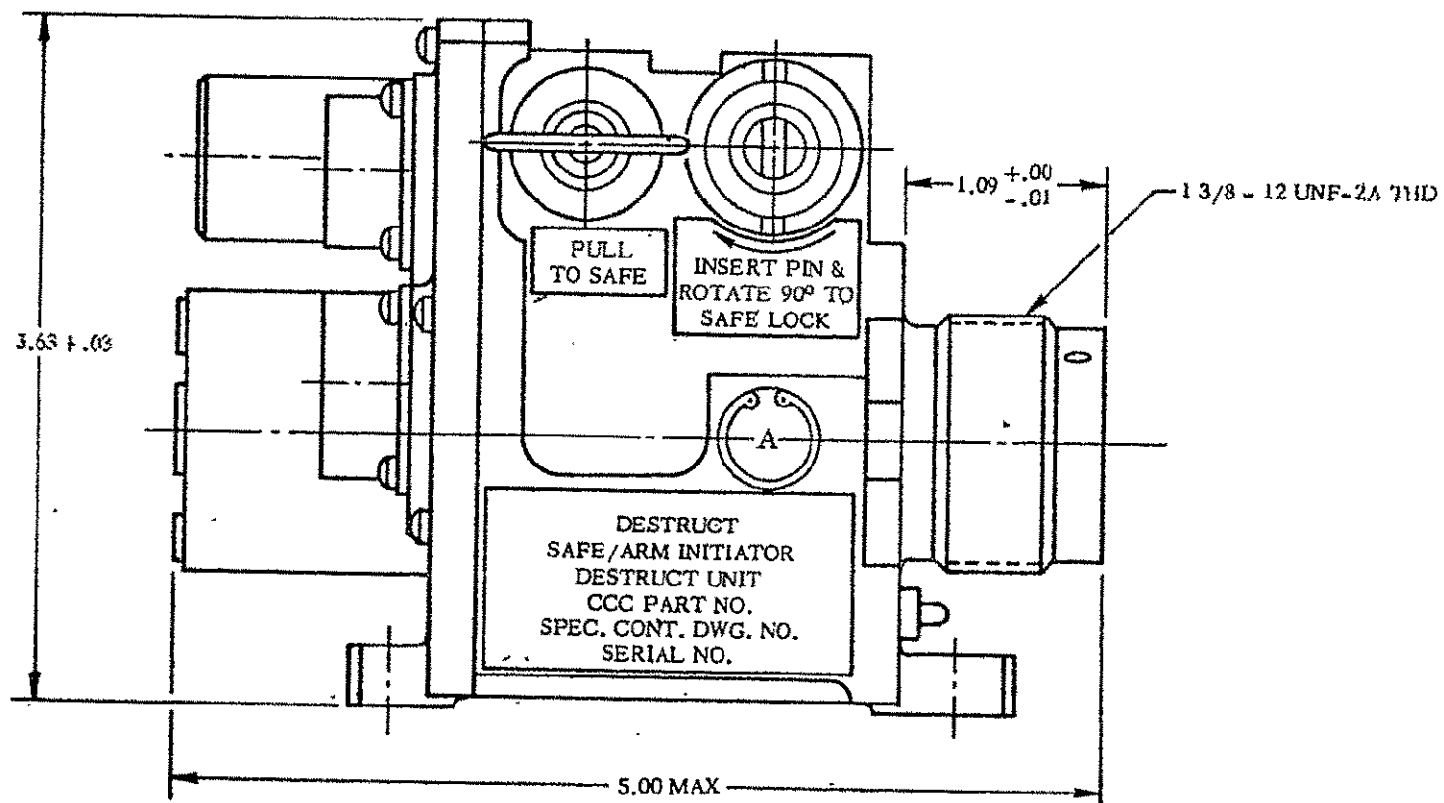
Outline Drawing of Surveyor Destruct Safe/Arm Initiator
